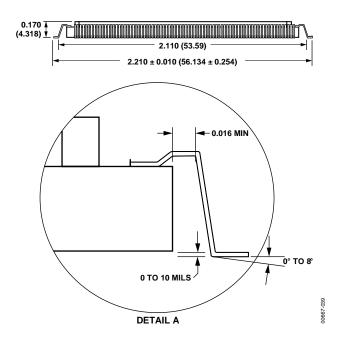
Package and Lead Profile Dimensions shown in inches and (millimeters)
